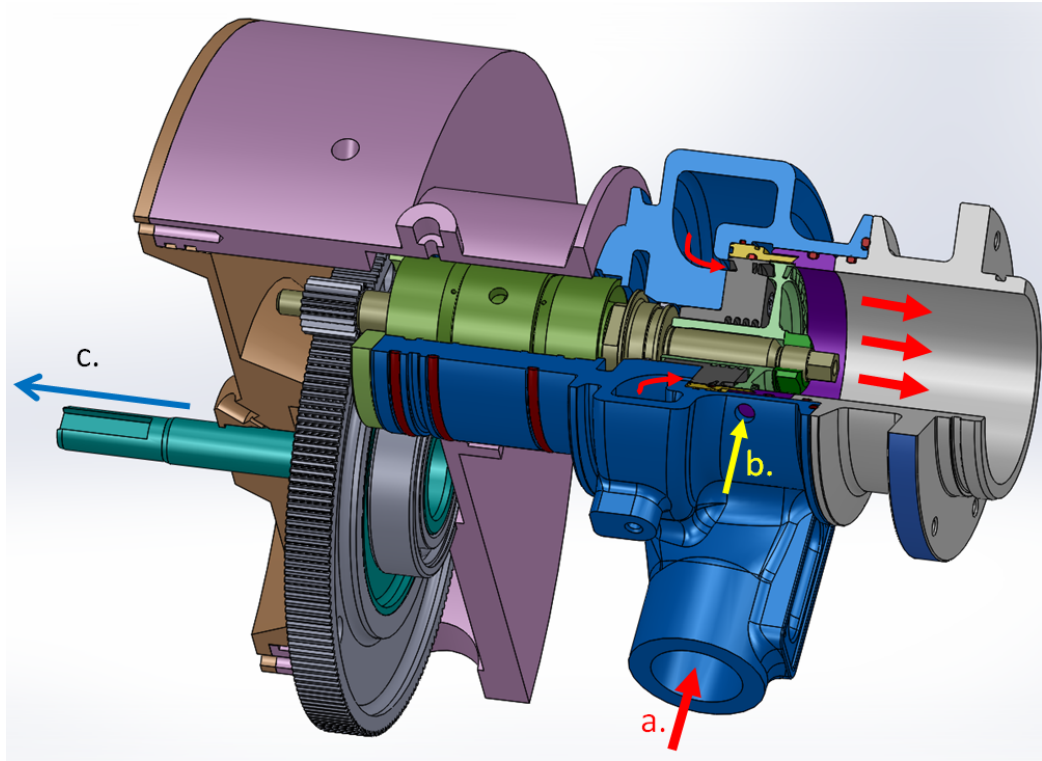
Cut Through Expander Unit Assembly Including Bearing Chamber and Gearbox with a. Indicating Main Flow Inlet and b. Fluidic Seal Flow Inlet as well as c. Slow Shaft Power Transmission Output.
